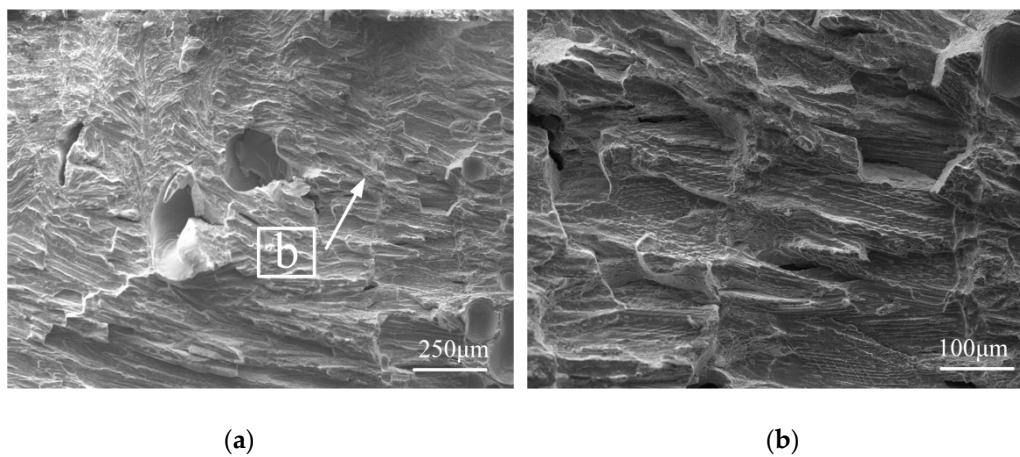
The fracture of the welded joint without preheating in tensile test: (a) The overall morphology; (b) the enlargement of b.
